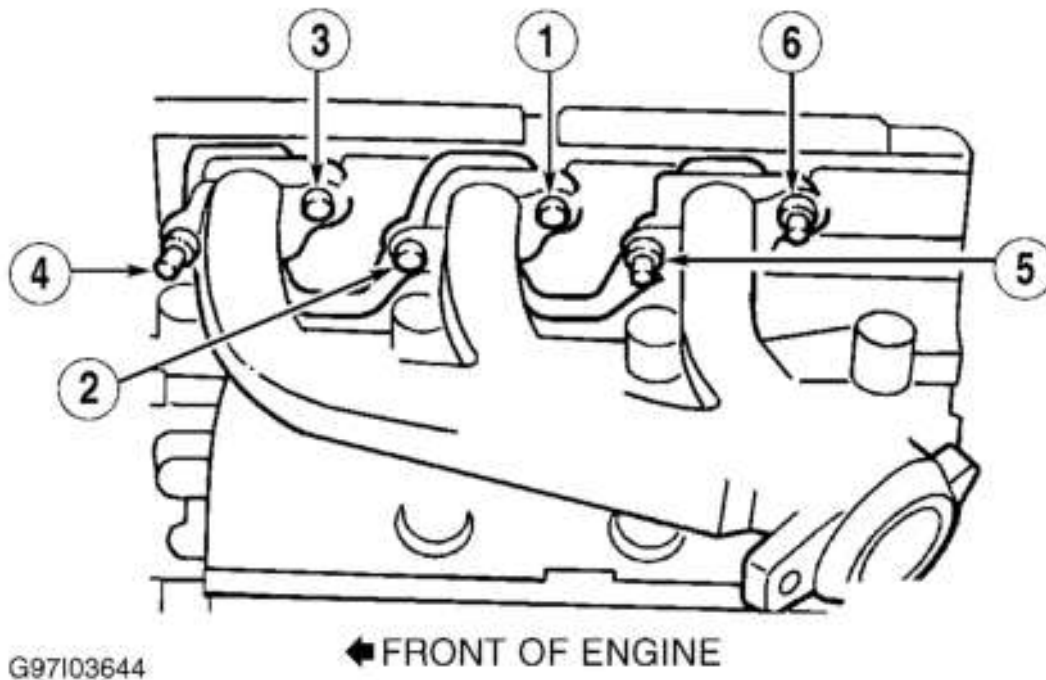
Exhaust Manifold Bolt Tightening Sequence
